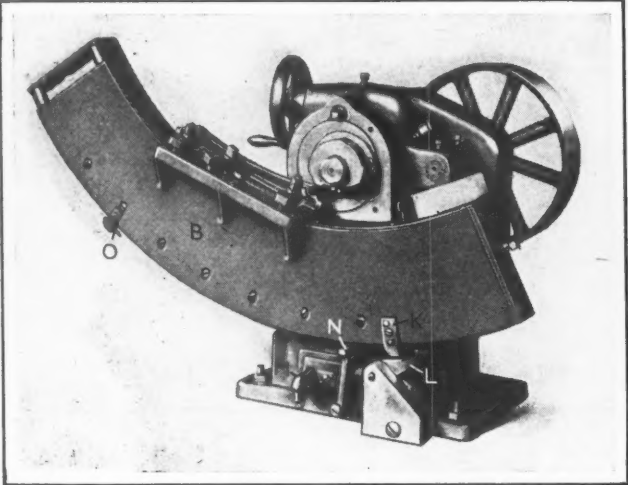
Machine in which the Wire Groove is milled in the Sub-lever Segment
